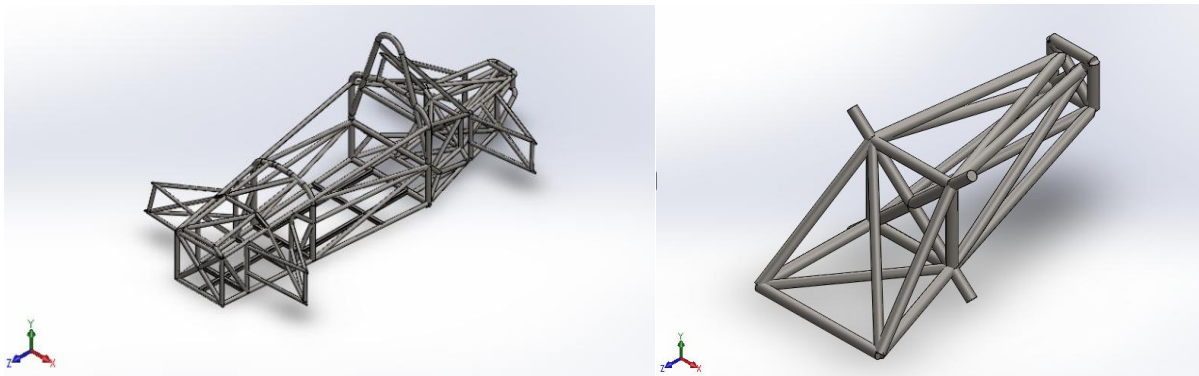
Chassis model prepared for tests and beam structure replacing engine and gearbox
